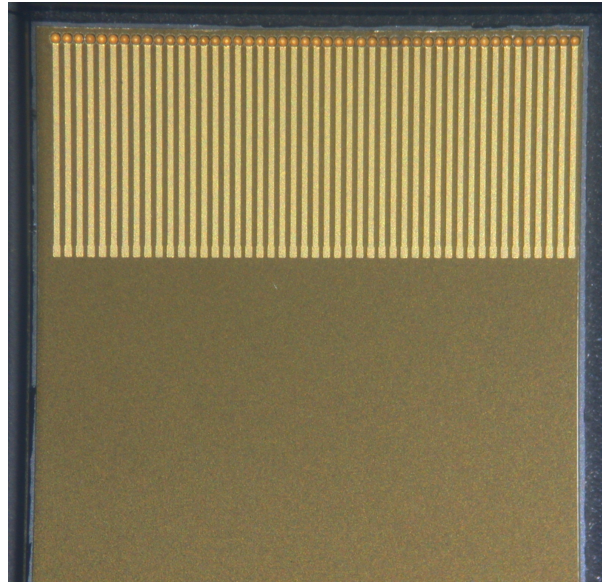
RDL and wire bond pads on the FE-I2 back side.
